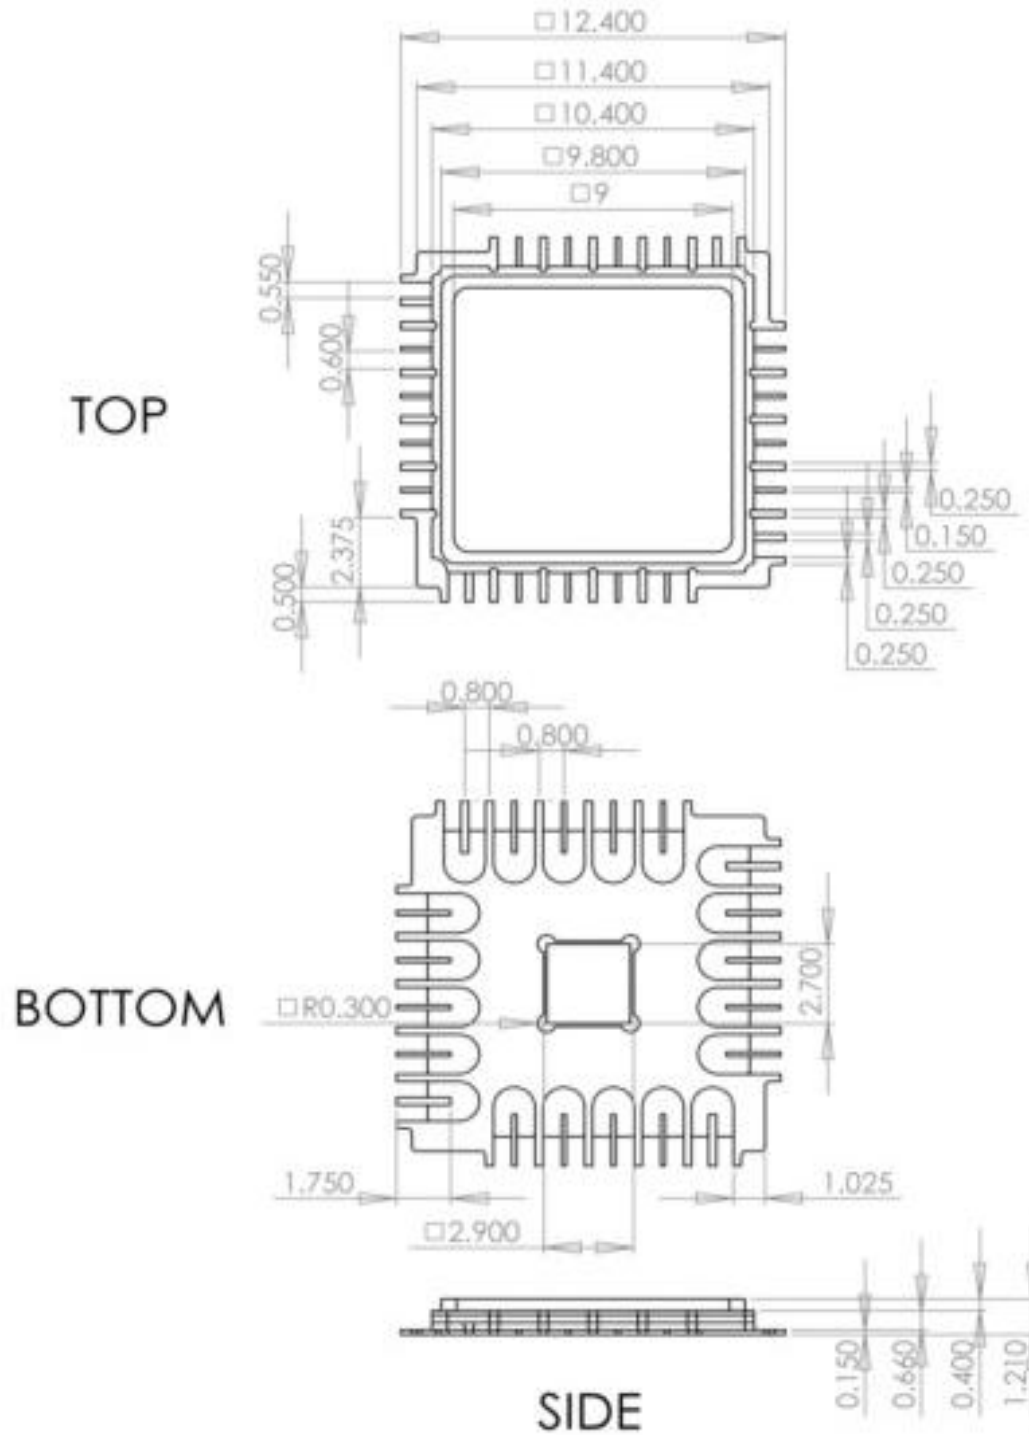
CQFP 44-Pin Package Drawing (All Dimensions in mm)
